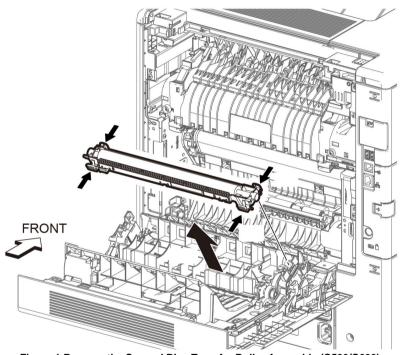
Remove the Second Bias Transfer Roller Assembly (C500/C600)
